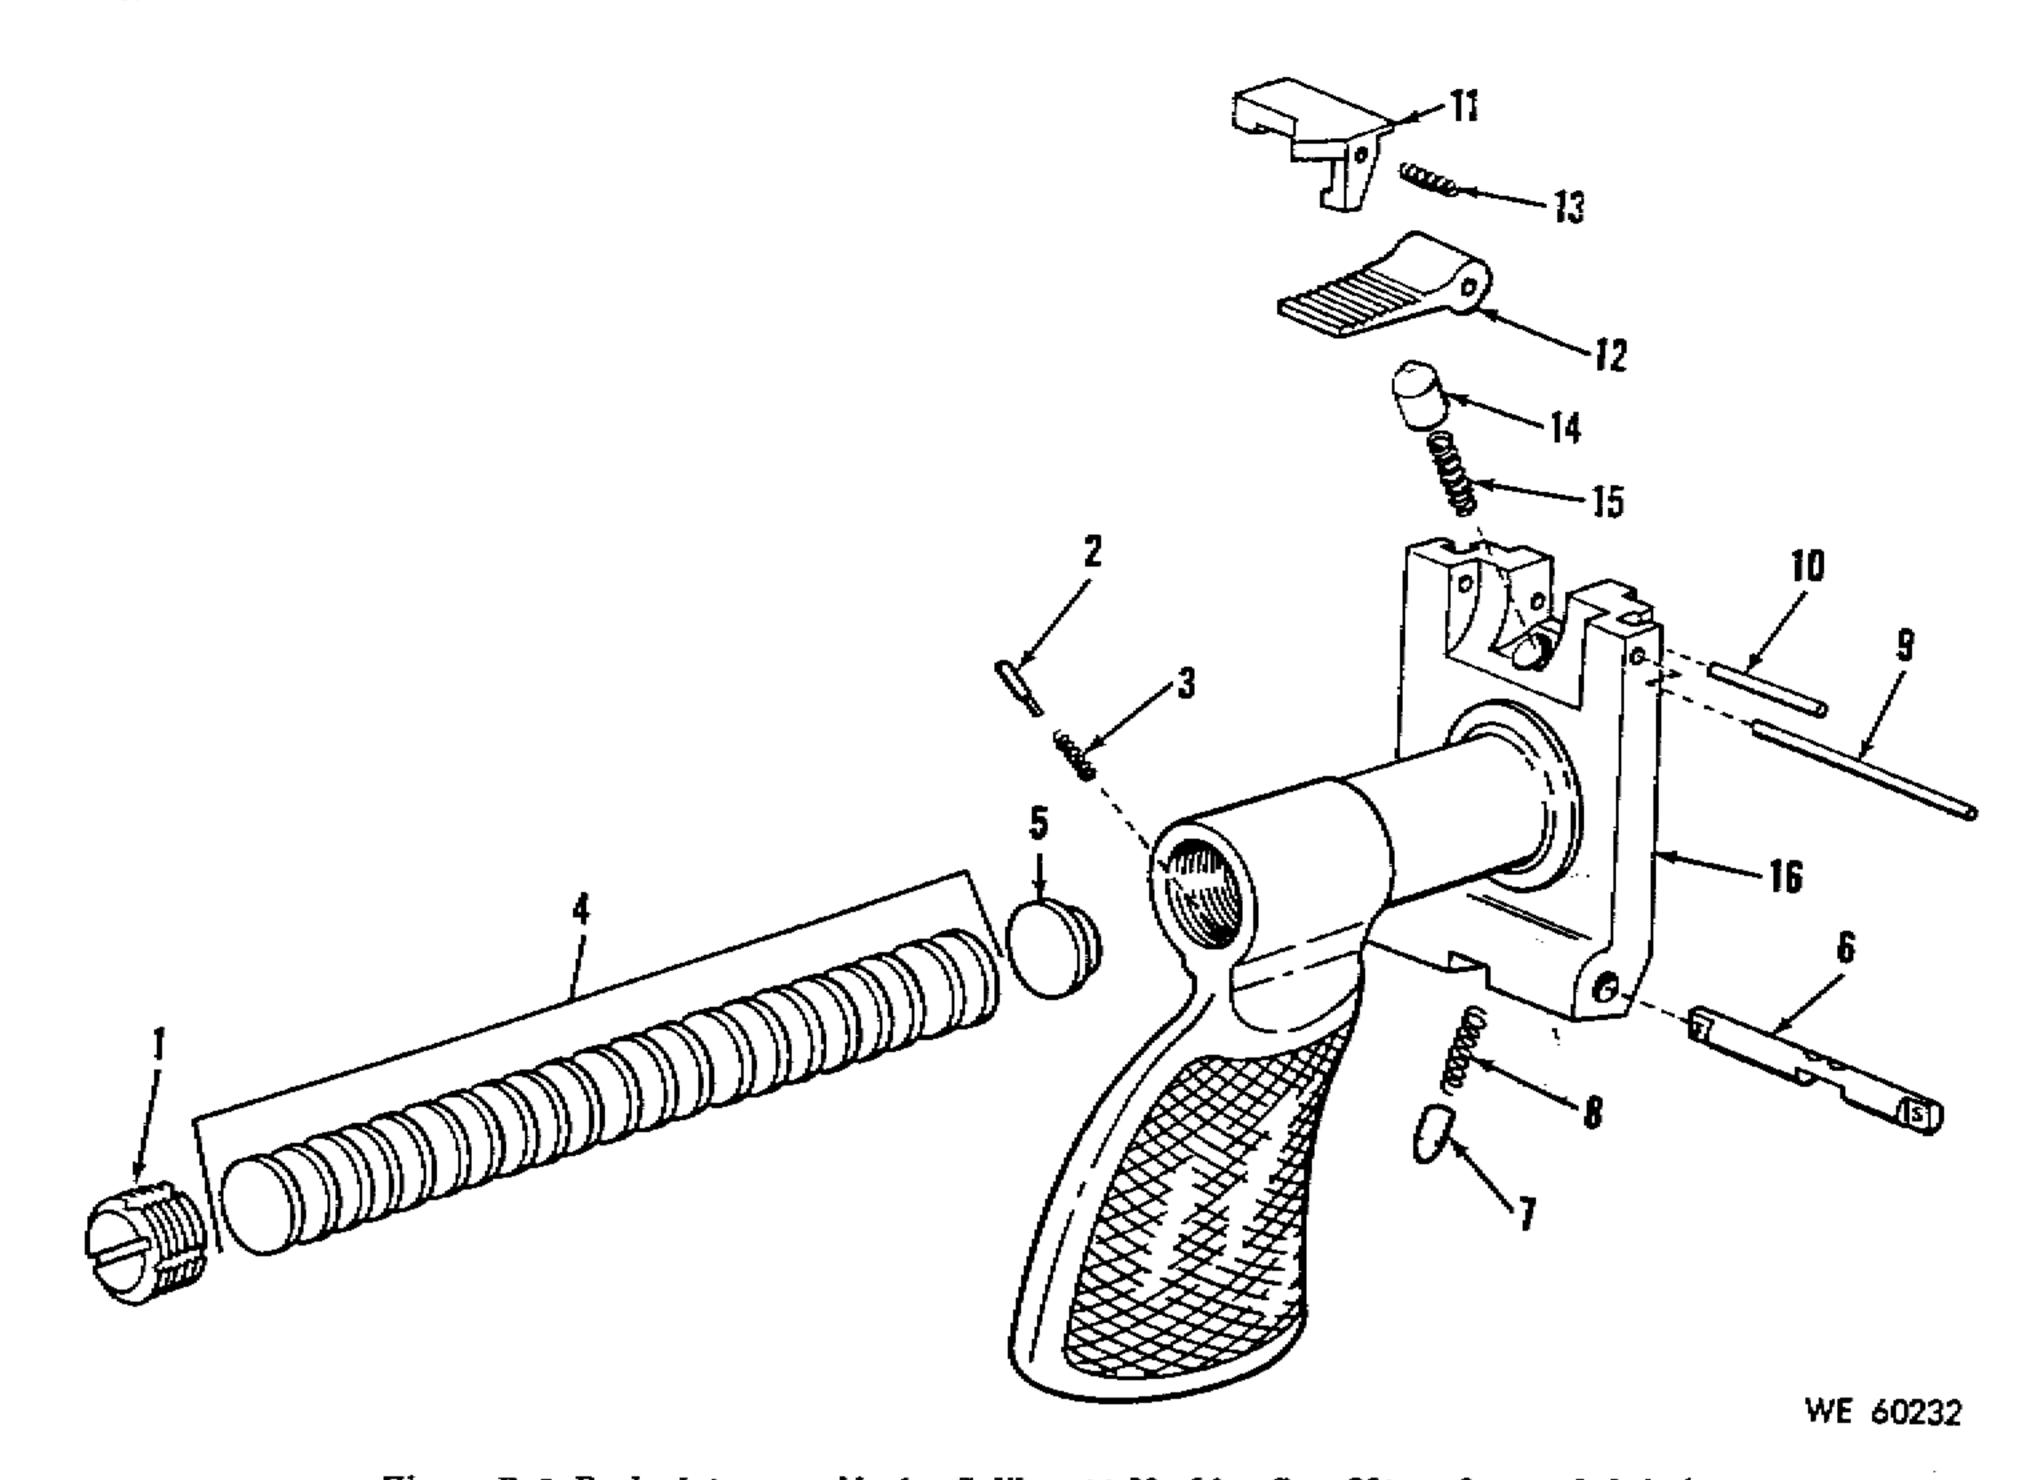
Back plate assembly for Caliber .30 Machine Guns, M1919A4 and M1919A6 only—exploded view.
